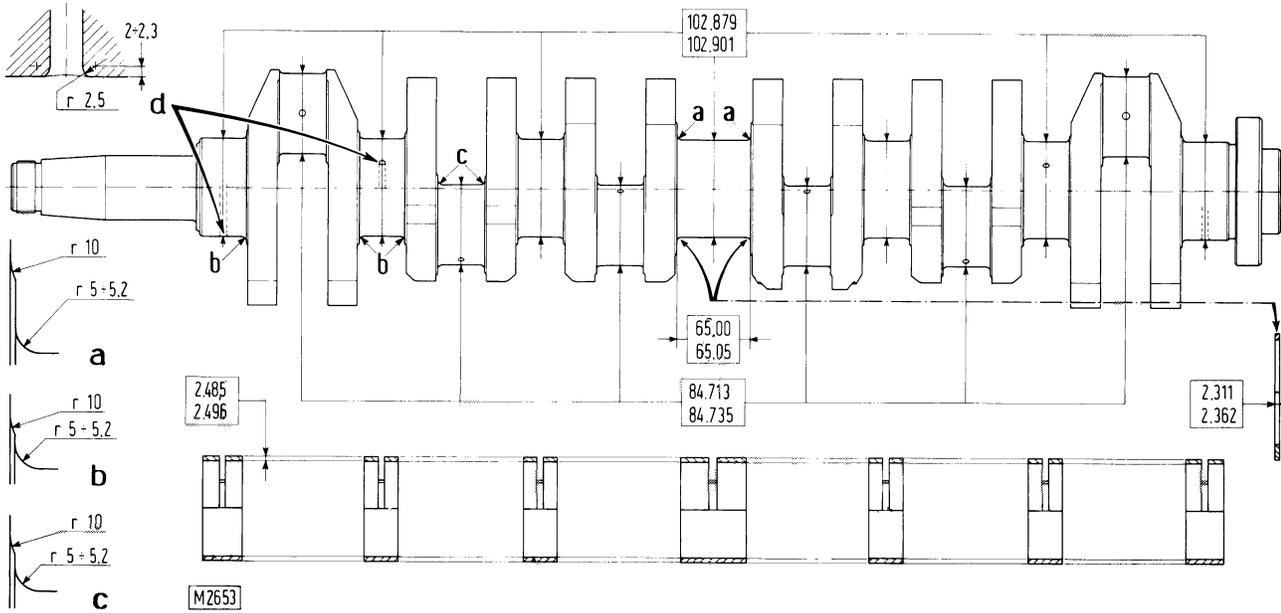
Crankshaft journal, bearing and thrust washer details.
